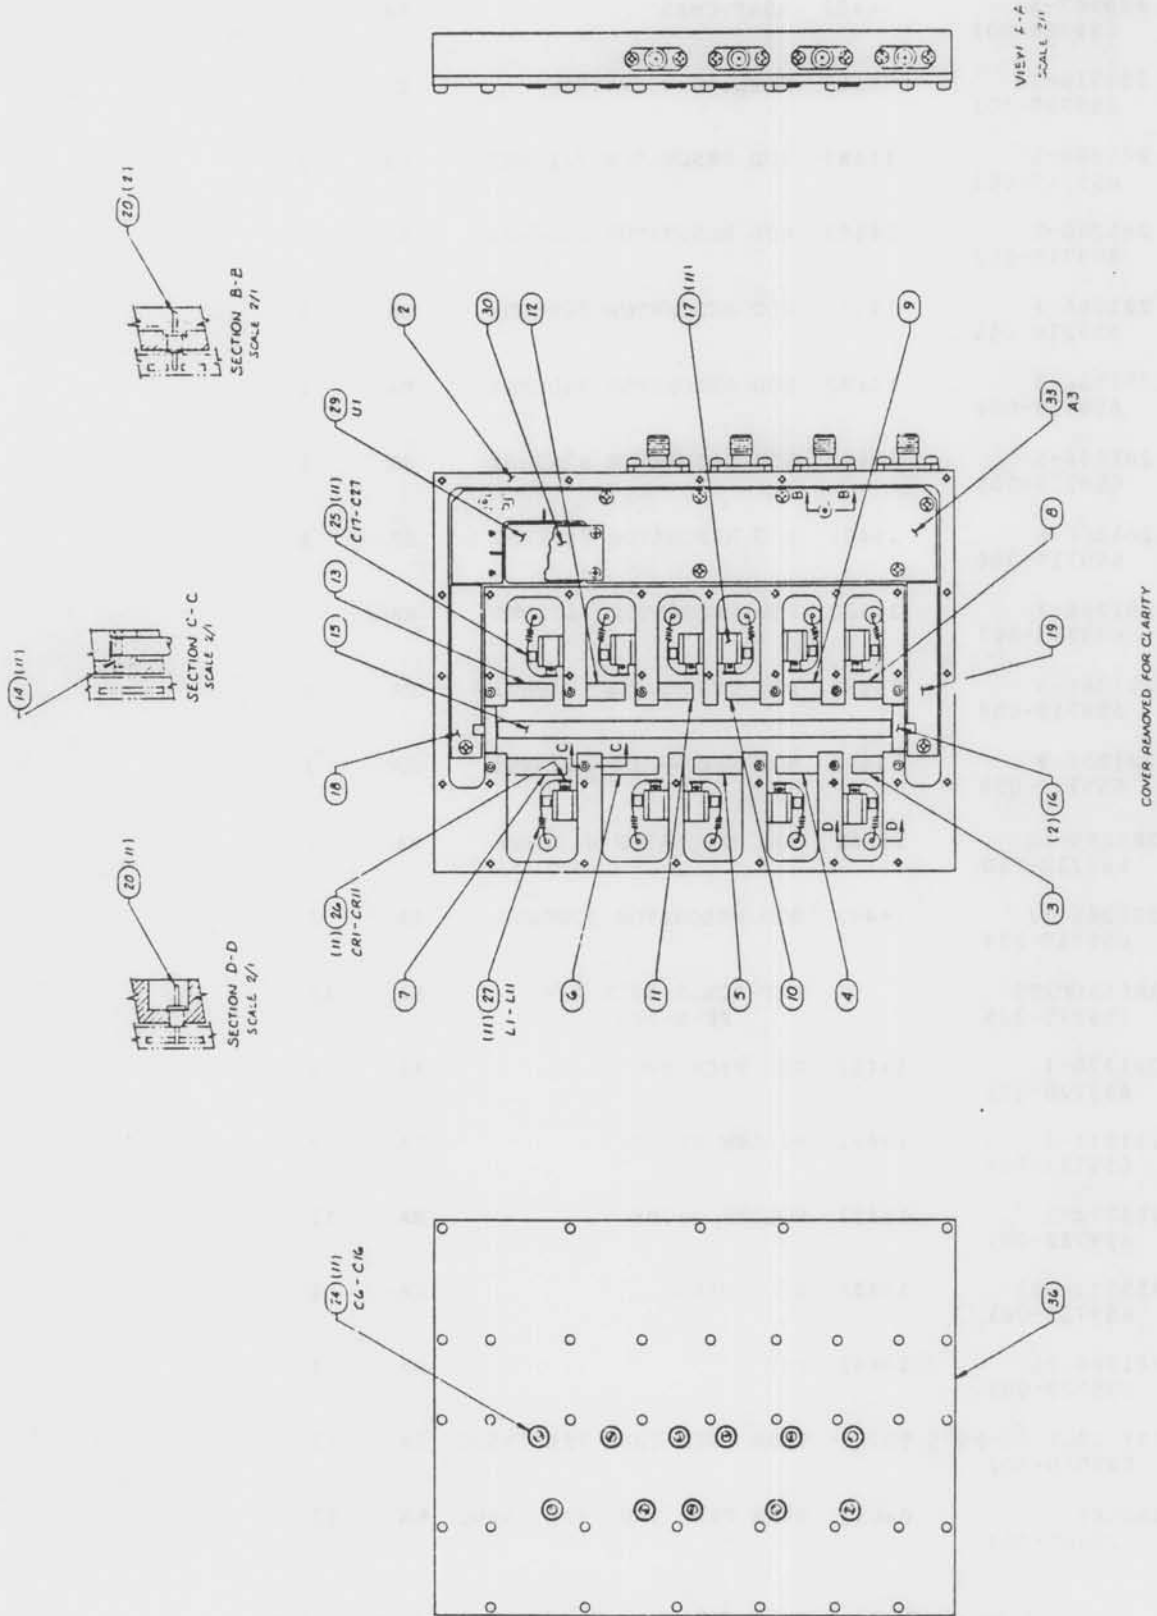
First LO Synthesizer A4 Parts List, Part No. 659903 (Sheet 2 of 5)
